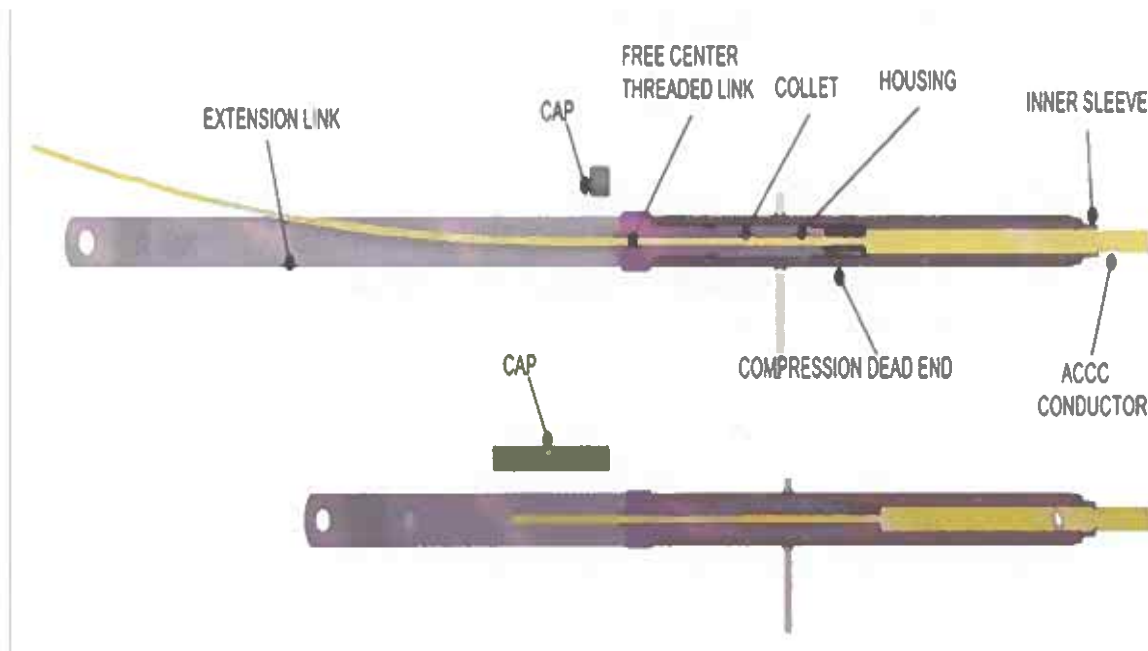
Illustration of Inspectable Deadend for ACCC Conductor Using Collet and Housing
